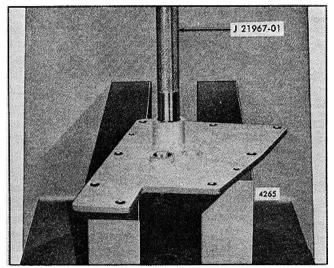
Removing Speed Control Shaft Bearing from Governor Cover using Tool J 21967-01
